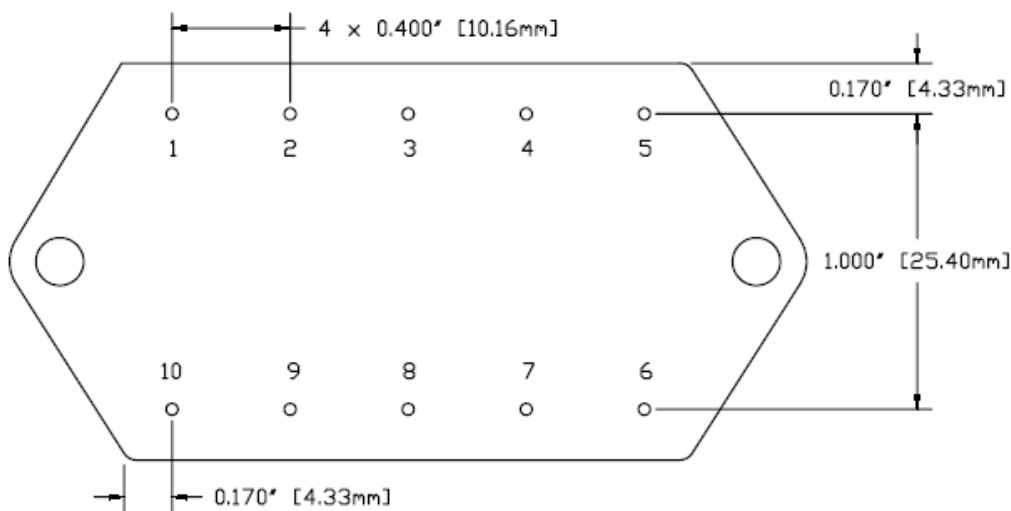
Non-Flanged, Seam Seal Package and Pinout
